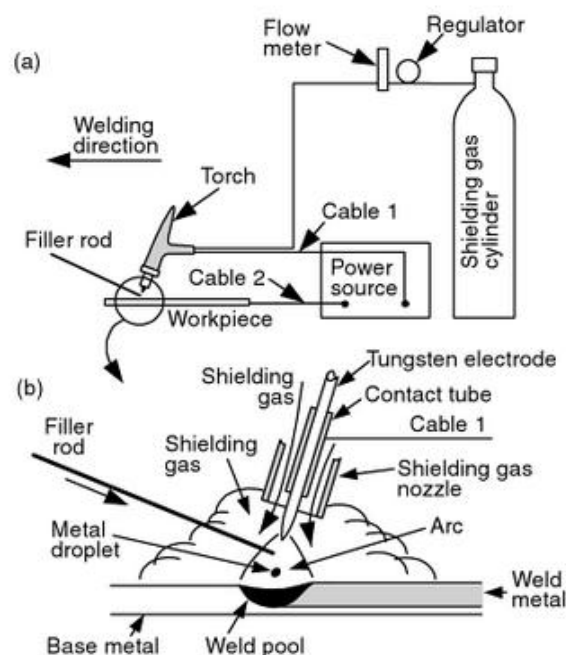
Gas tungsten arc welding (a) Overall process (b) Welding area enlarged [35].
